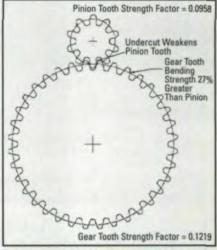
Standard addendum 10-tooth pinion with standard addendum 36-tooth gear.
